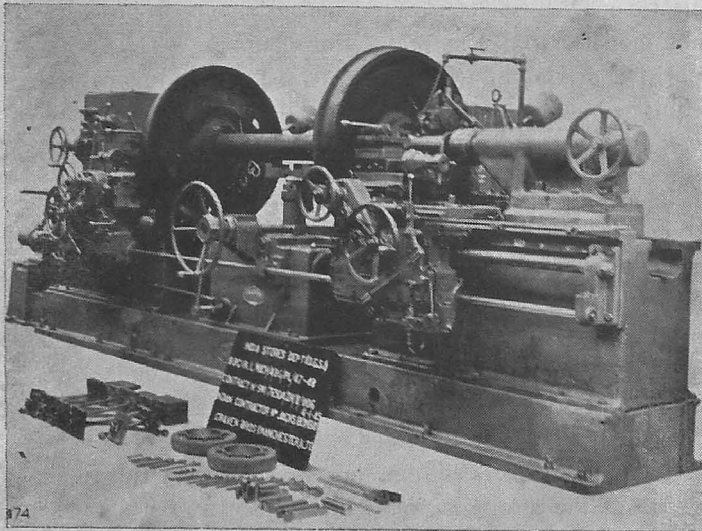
Friction roller Type axle journal returning & Burnishing lathe. (craven make)
